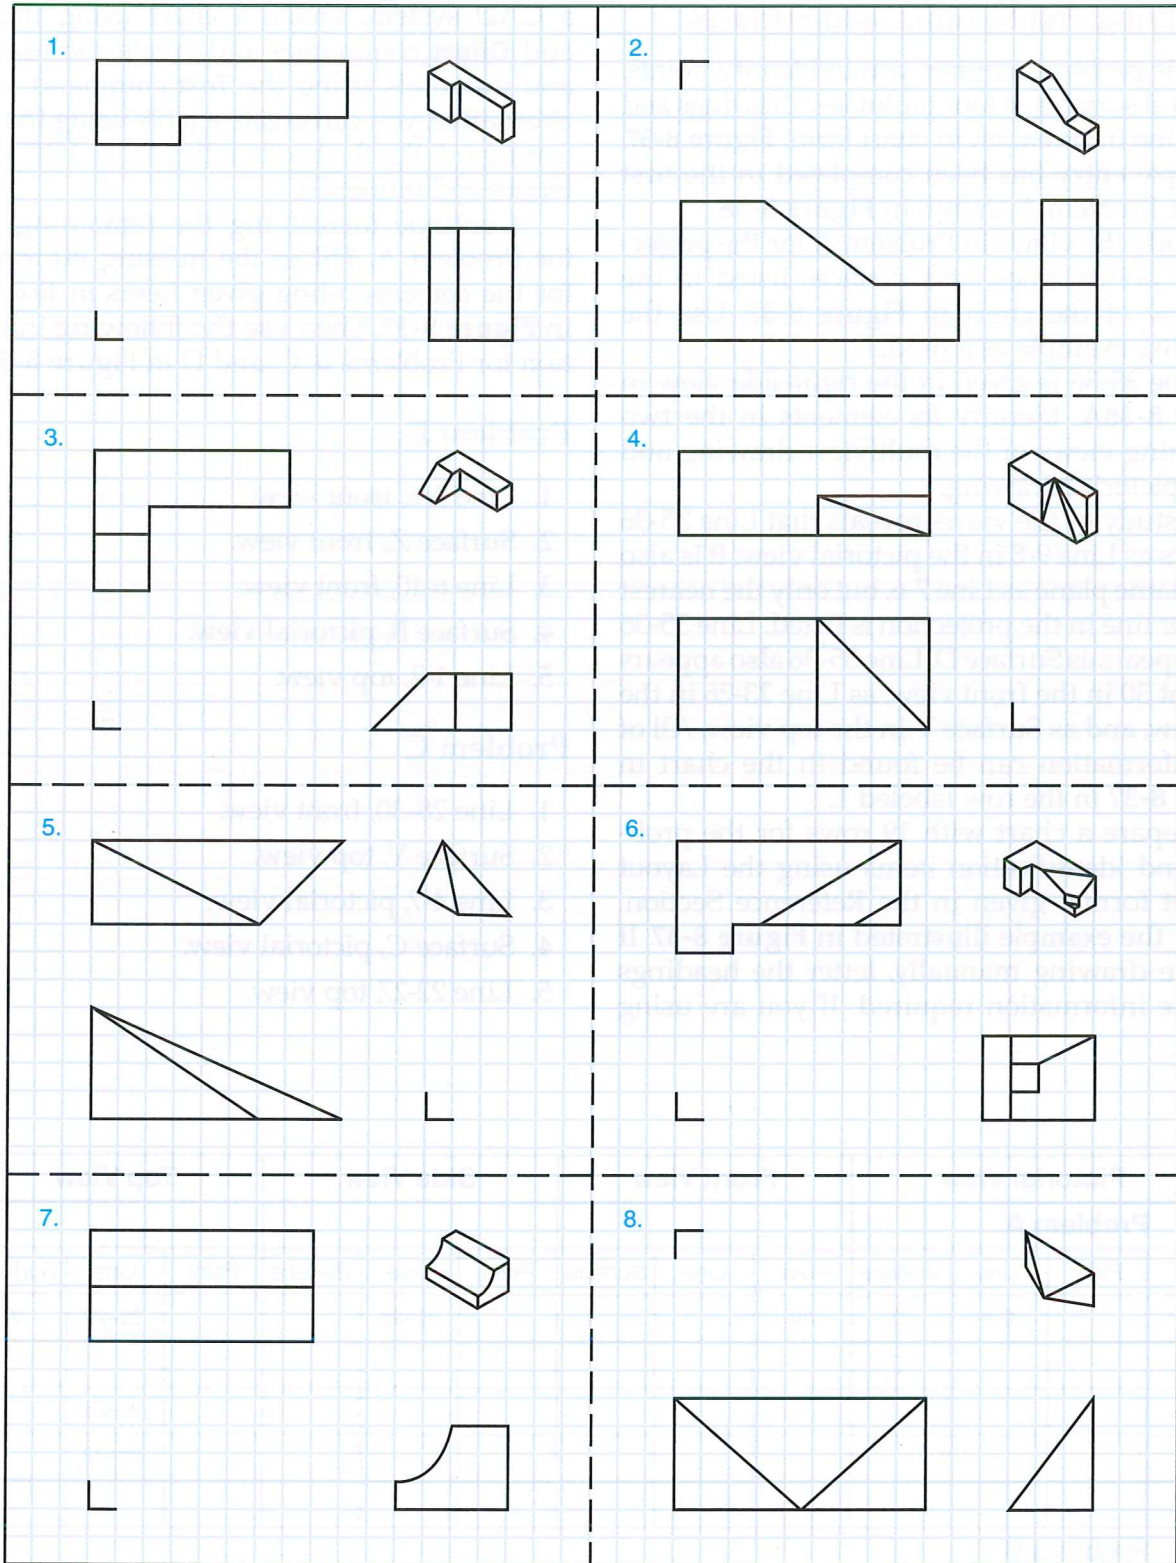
Shown are multiview drawings with missing views. Draw each problem and complete the missing view.
